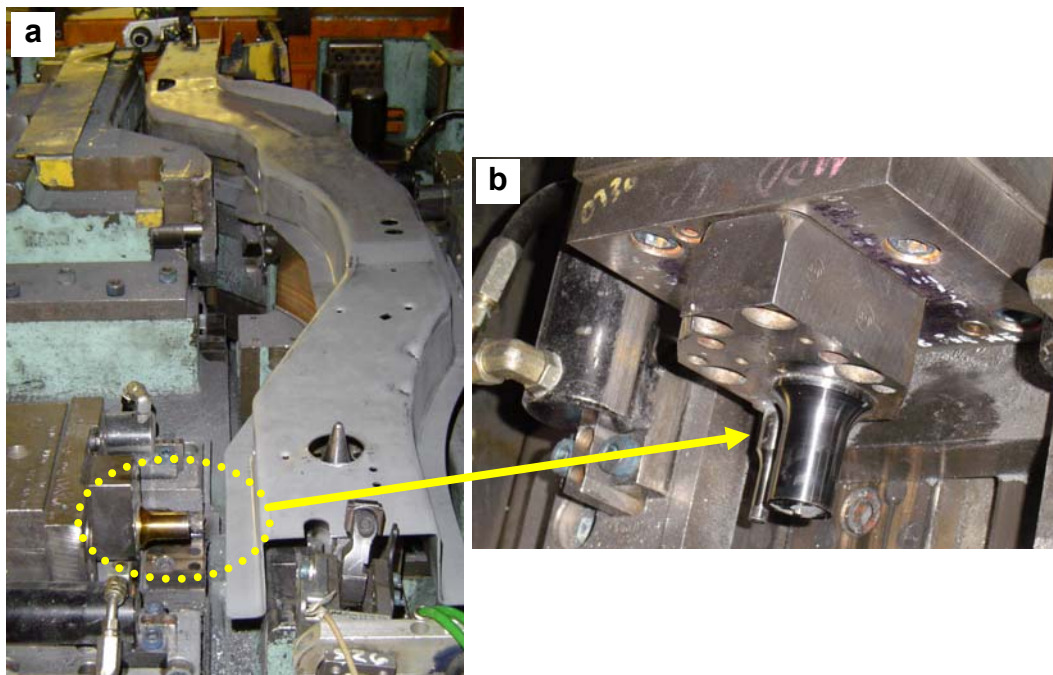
(a) An automotive manufacturer's stamping die and (b) the coated punch installed on the stamping die.
